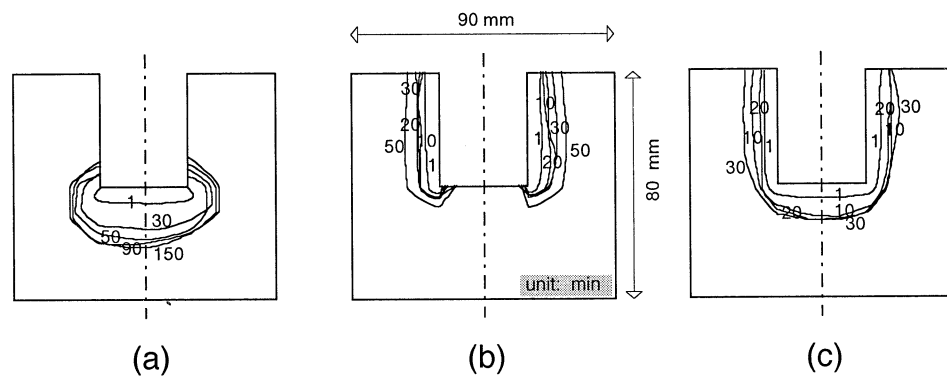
Development of liquid front in the (a) bottom, (b) side and (c) side-bottom mold systems.
